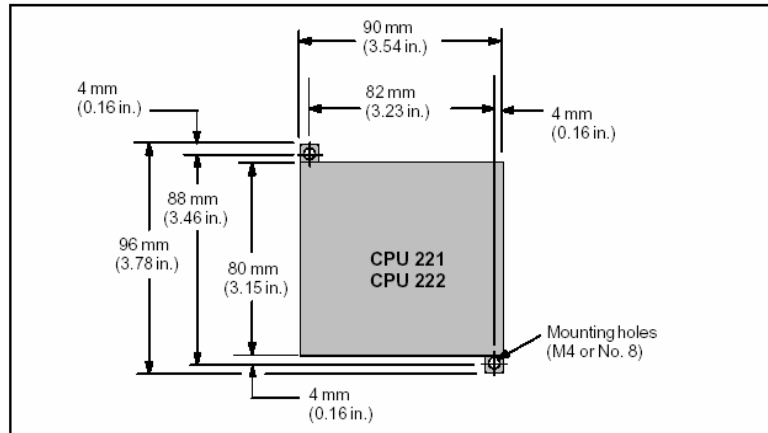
Mounting Dimensions for CPU 221 and CPU 222
